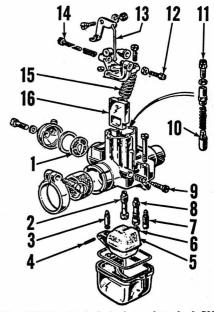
Exploded view of typical SH carburetor. Model SHB used on Cento is not provided with pilot jet (7) and atomizer (8).
